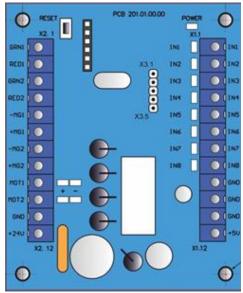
Appearance of the controller PCB.201.01.00.00 for the rotor motorized mechanism
